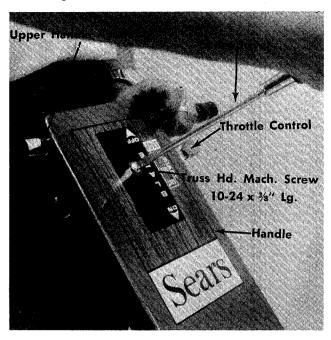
HANDLE PANEL ASSEMBLY TO HANDLE
